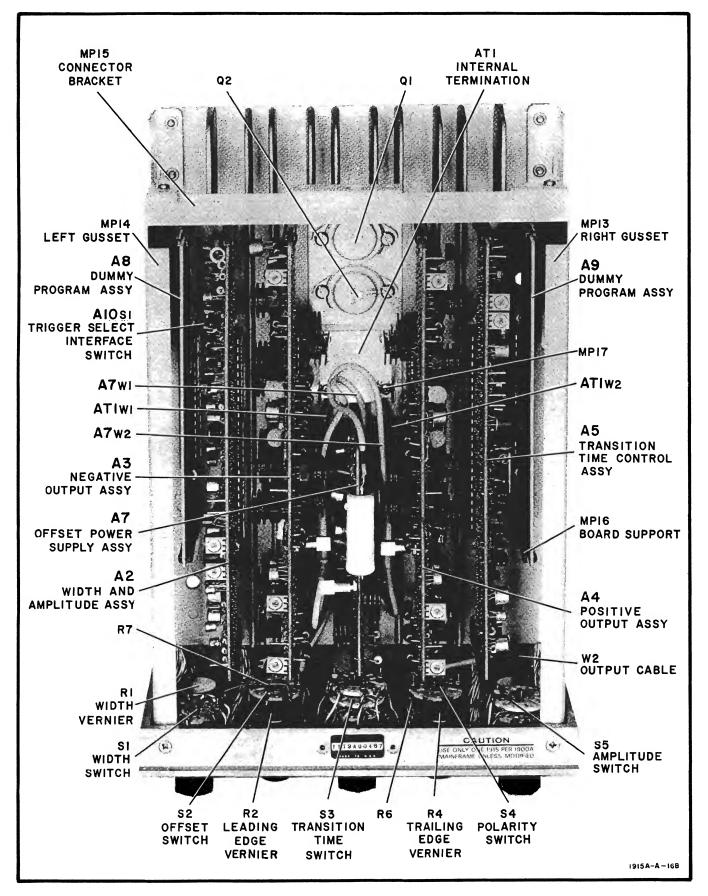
Assemblies and Chassis Mounted Parts Locations (Top View)
